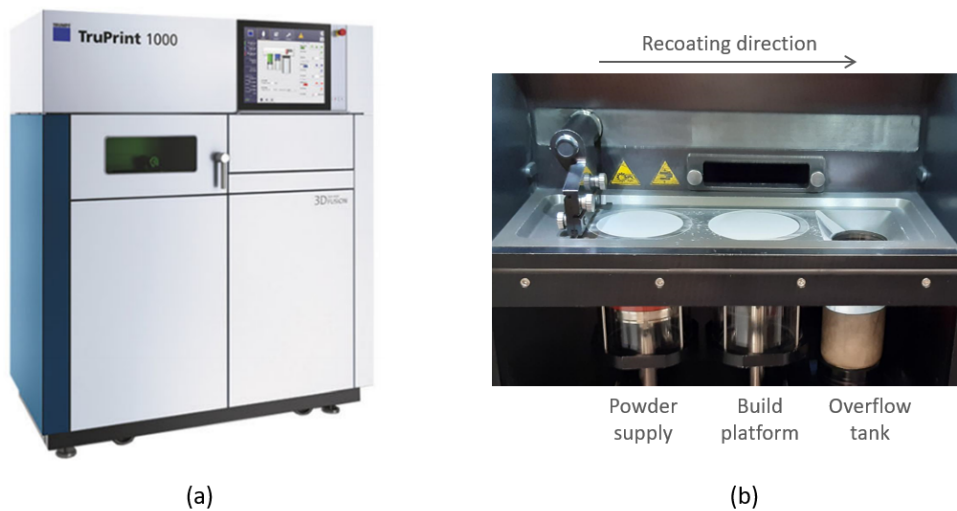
(a) Trumpf TruPrint 1000 L-PBF machine, (b) Build chamber of the printer.
